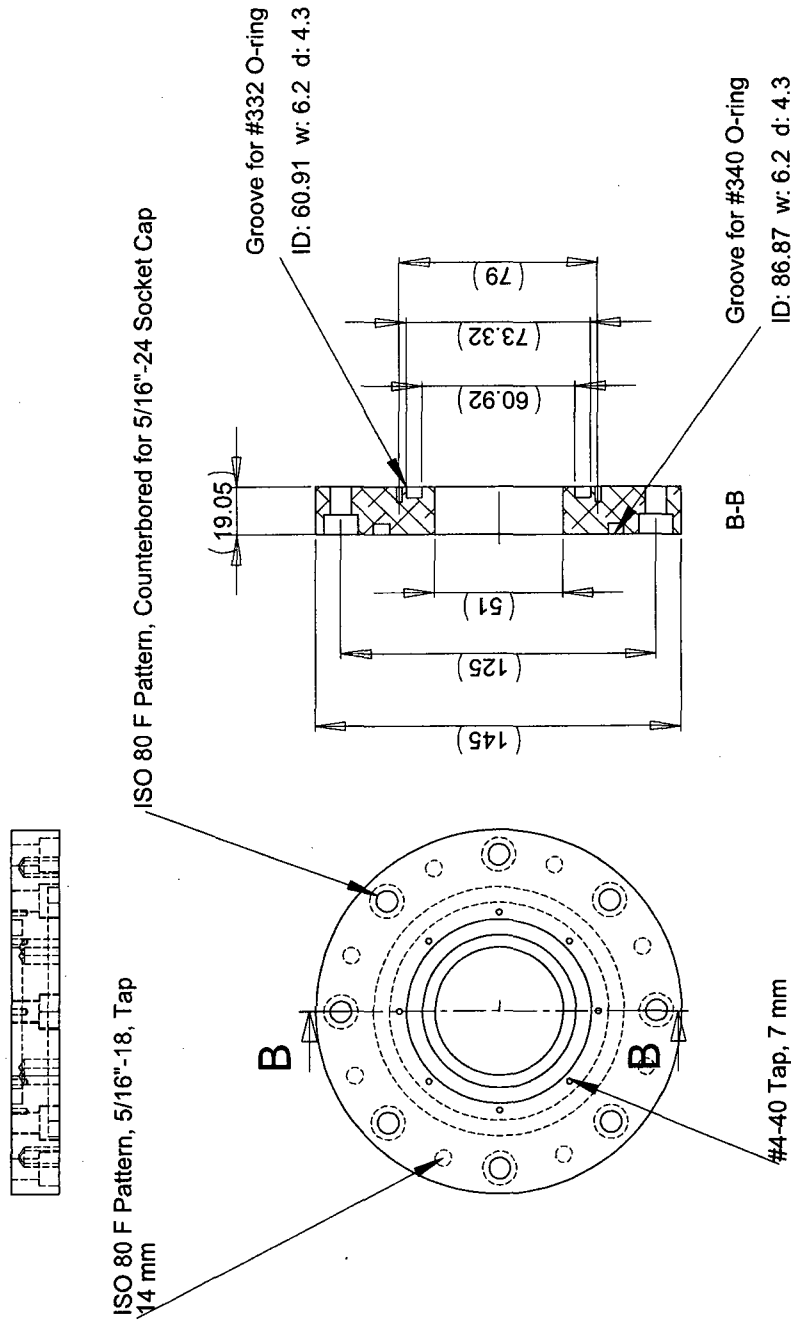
The chamber valve flange mounts the valve assembly inside an ISO80F flange on the vacuum system.
